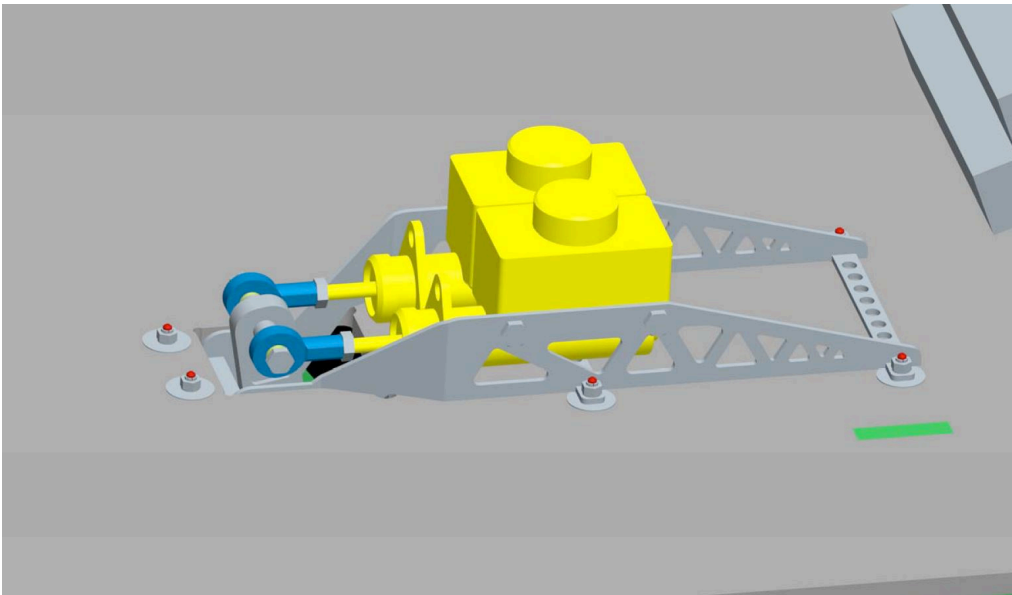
The master cylinder and pedal assembly as viewed from above the chassis
